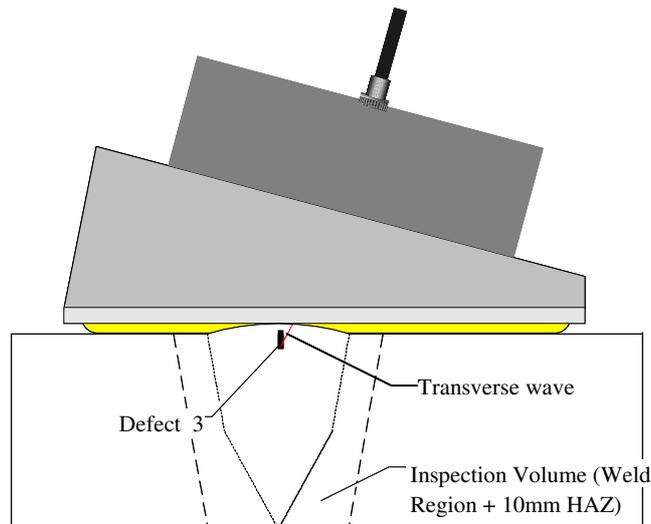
Experimental set-up to demonstrate the capability for near surface inspection in region of a weld cap using the membrane coupled phased array device.
